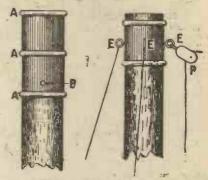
Details of the rings and ferrules. The right hand drawing shows how eyelets are used to hold the guy wires.
